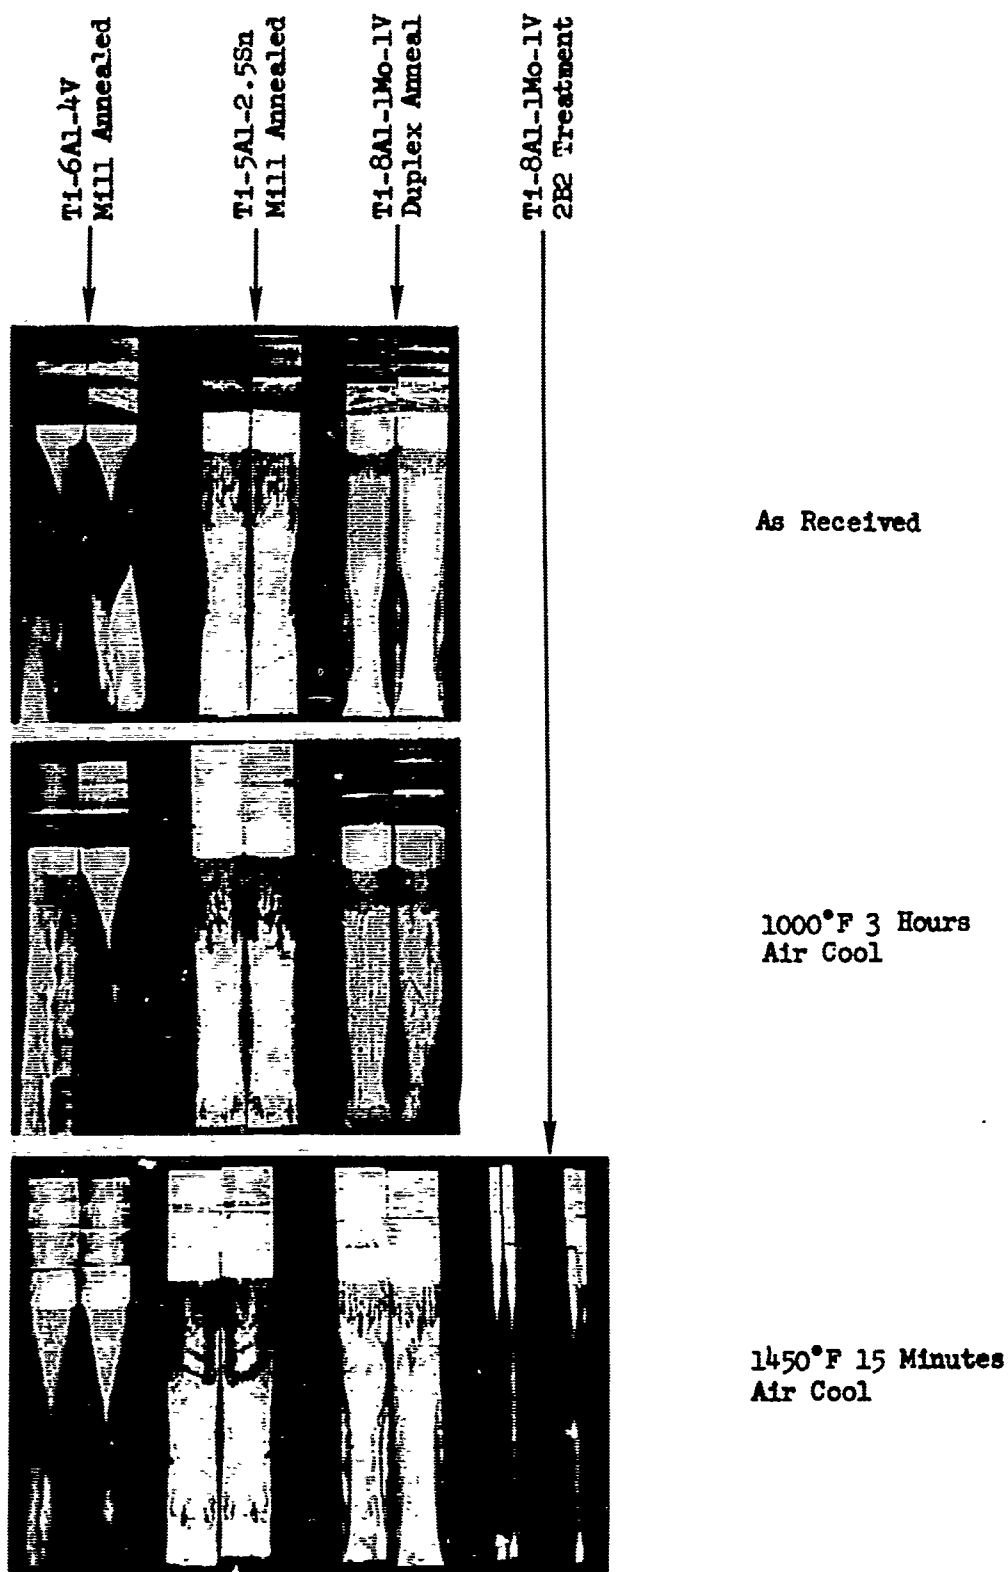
Appearance of Fractured Surfaces of Edge-Cracked Specimens in Sea Water
